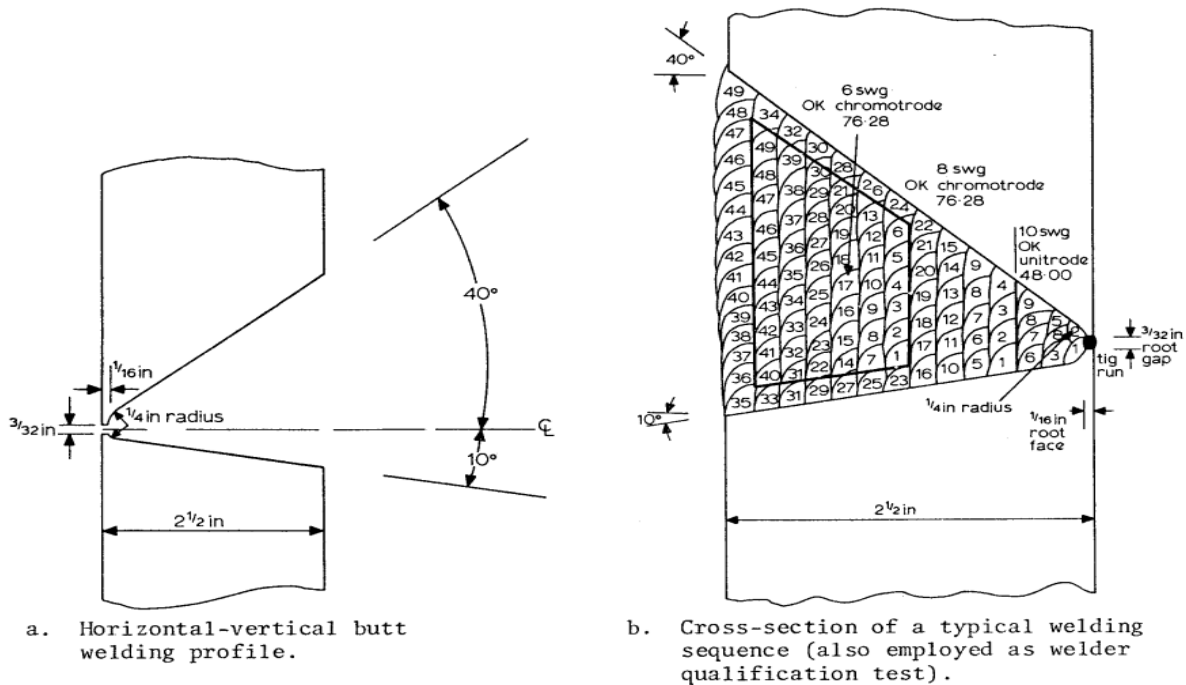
Horizontal Weld Groove and Welding Sequence Used in Cast-Weld Fabrication in the Horizontal Welding Position [50]
